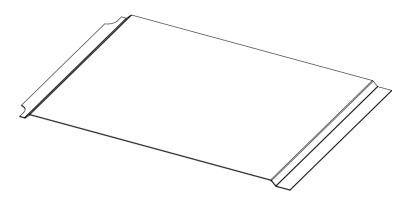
Small Card Bottom Side Insulator (Top and Side View)
